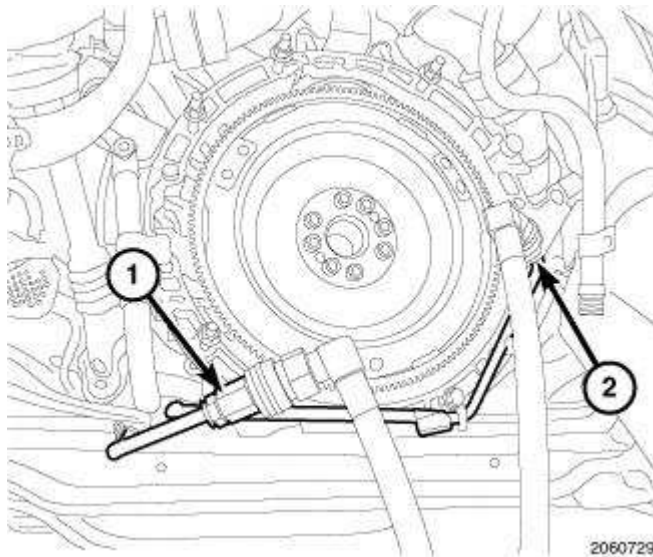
Installing Trans Cooler Cleaner To Transmission Oil Cooler
